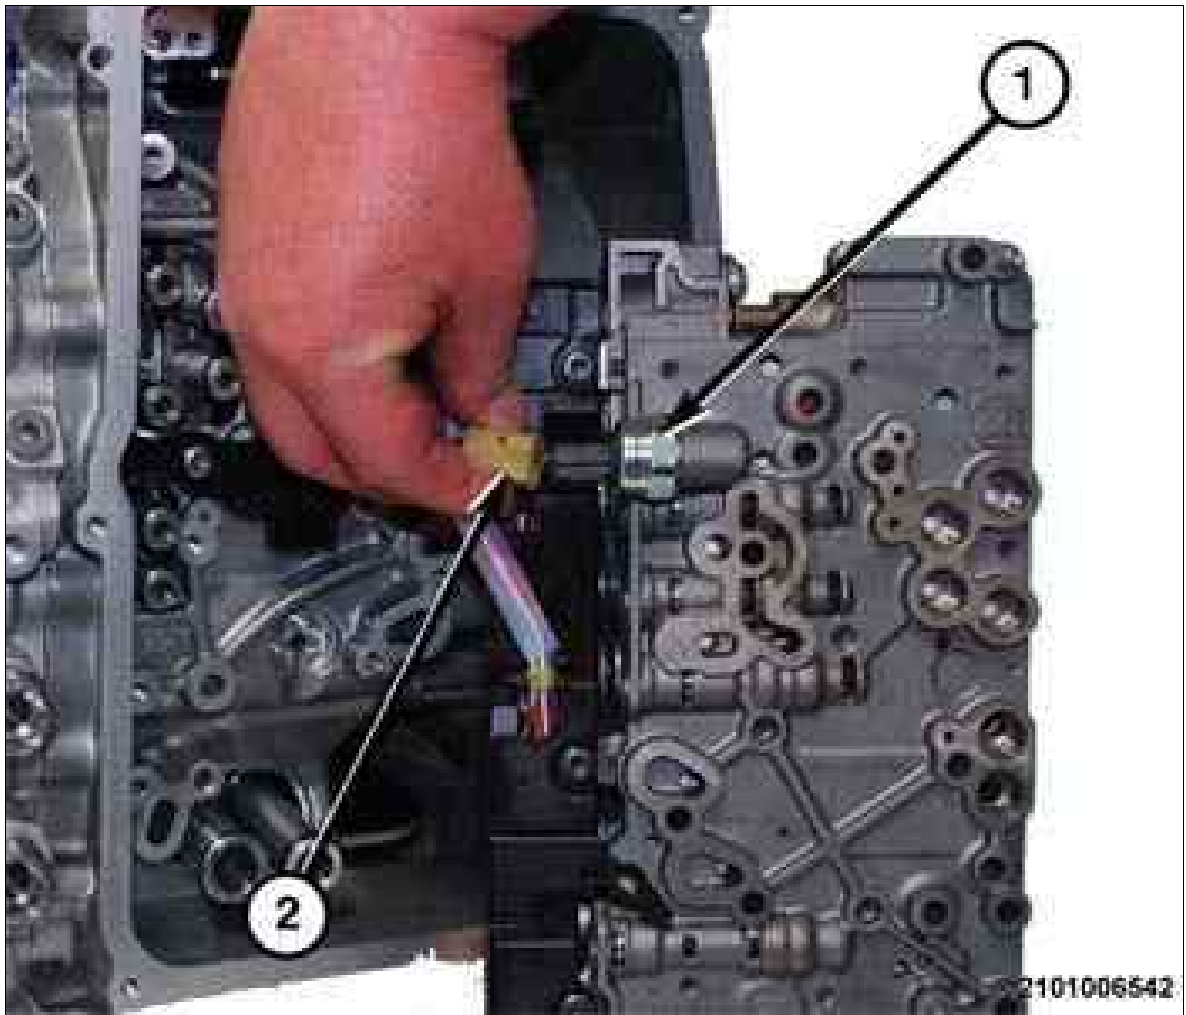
Removing/Installing Wire Harness Connector At Valve Body Solenoids
